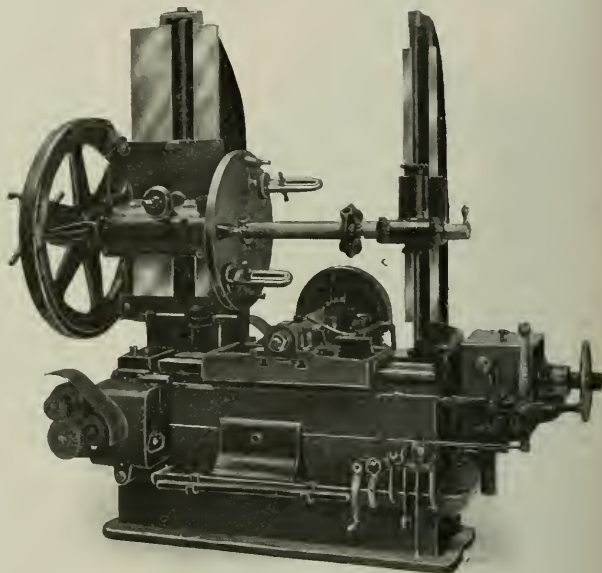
Eberhardt Bros. No. 5 Automatic Gear Cutter for Spur Gears.
